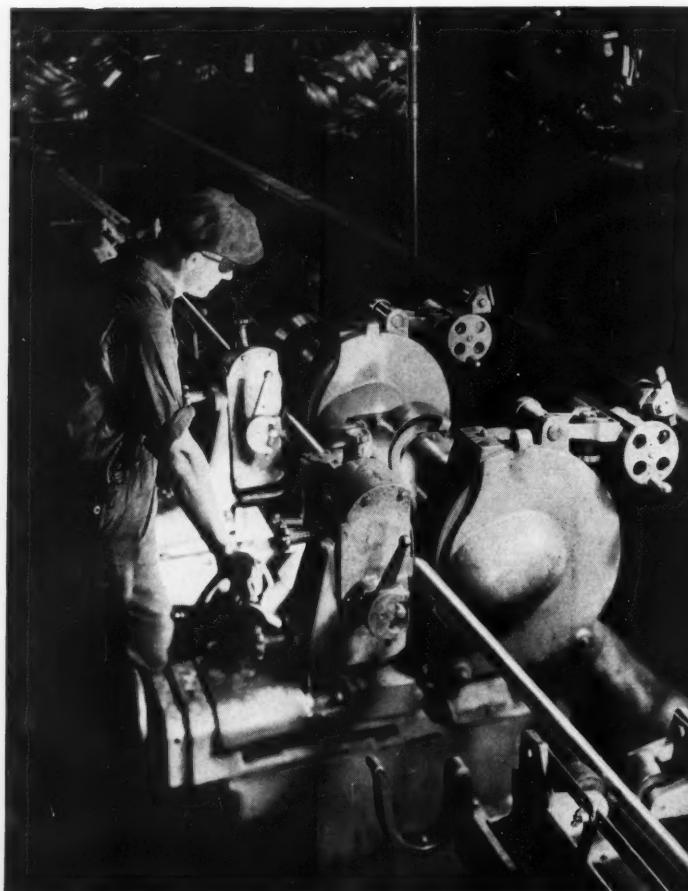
(Above). Straightening and polishing stainless steel bars, Newburgh Works, American Steel & Wire Co.
